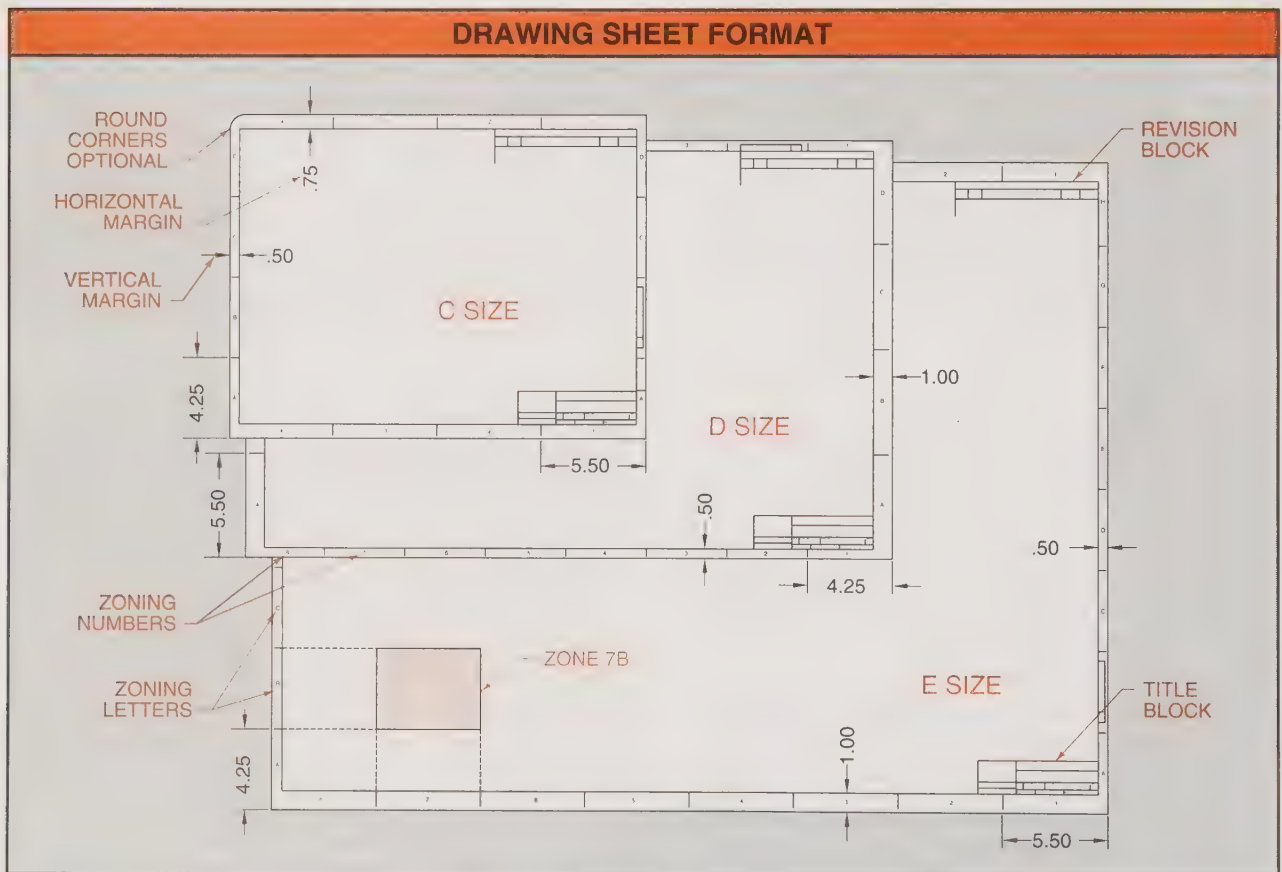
The basic format of drawing sheets includes the title block, margins, and zoning.
